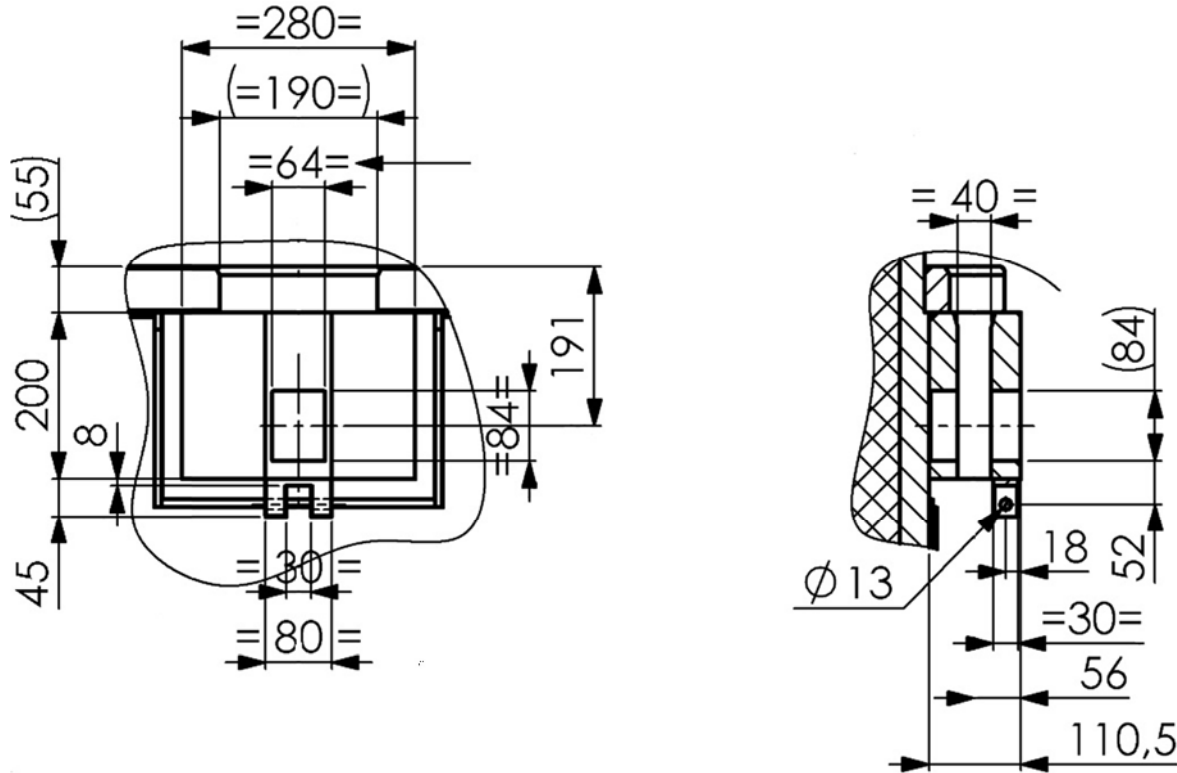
RT-100 Lifting Pocket Dimensions
